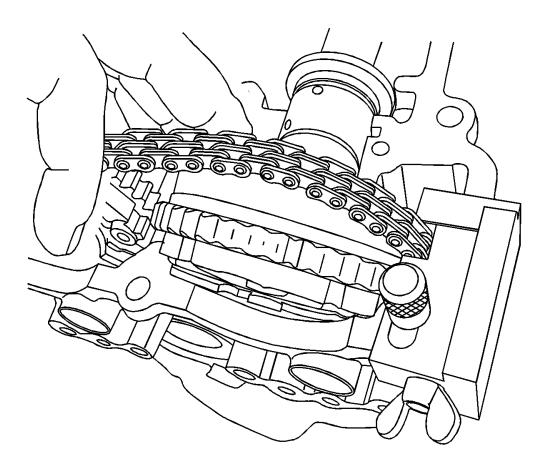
Tilting Camshaft Position Actuator Forward Courtesy of GENERAL MOTORS COMPANY
